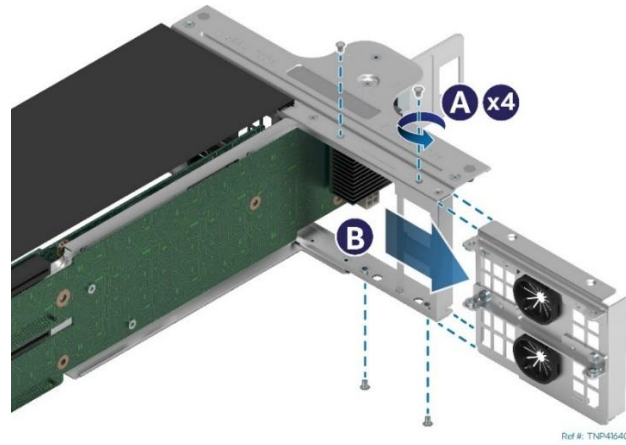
Accelerator Riser Assembly Rear Bracket Removal
